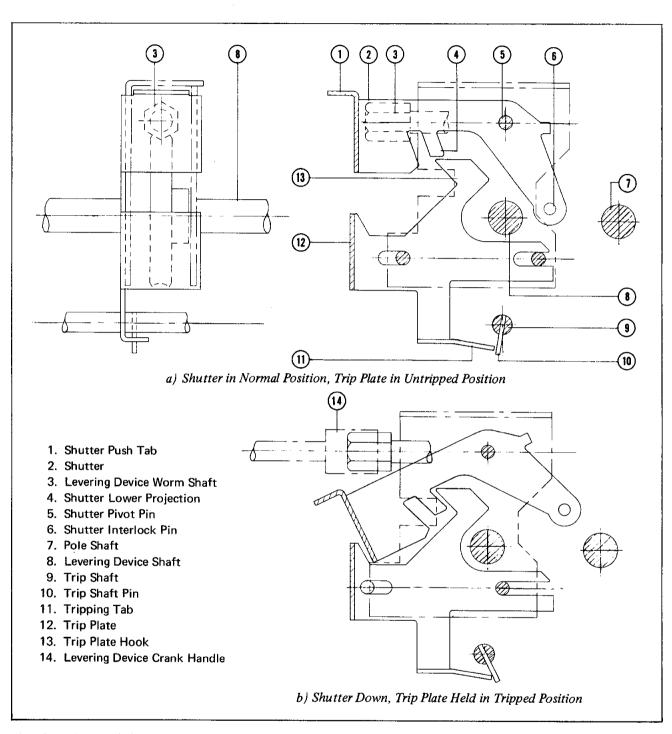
Relation of Shutter, Trip Plate, and Trip Shaft
